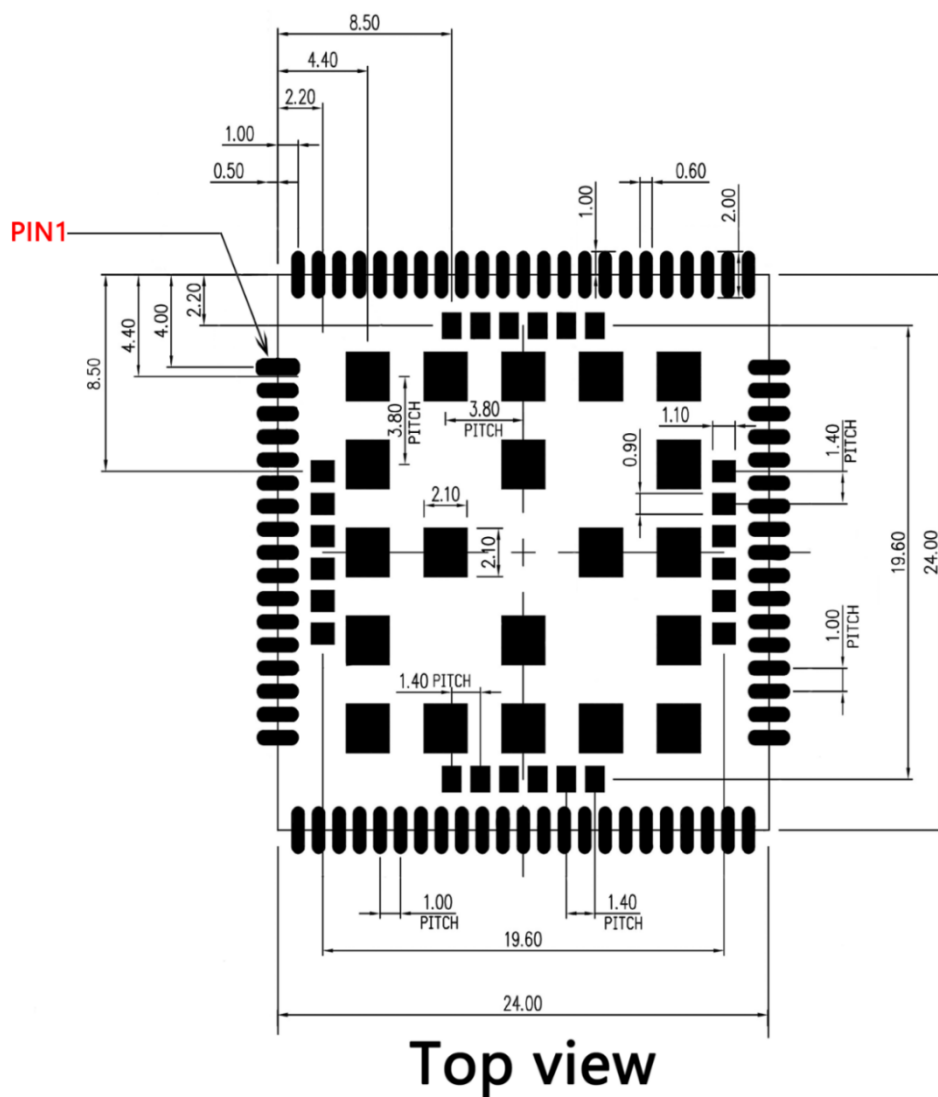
Module Recommended Packaging (Unit: Millimeters)
